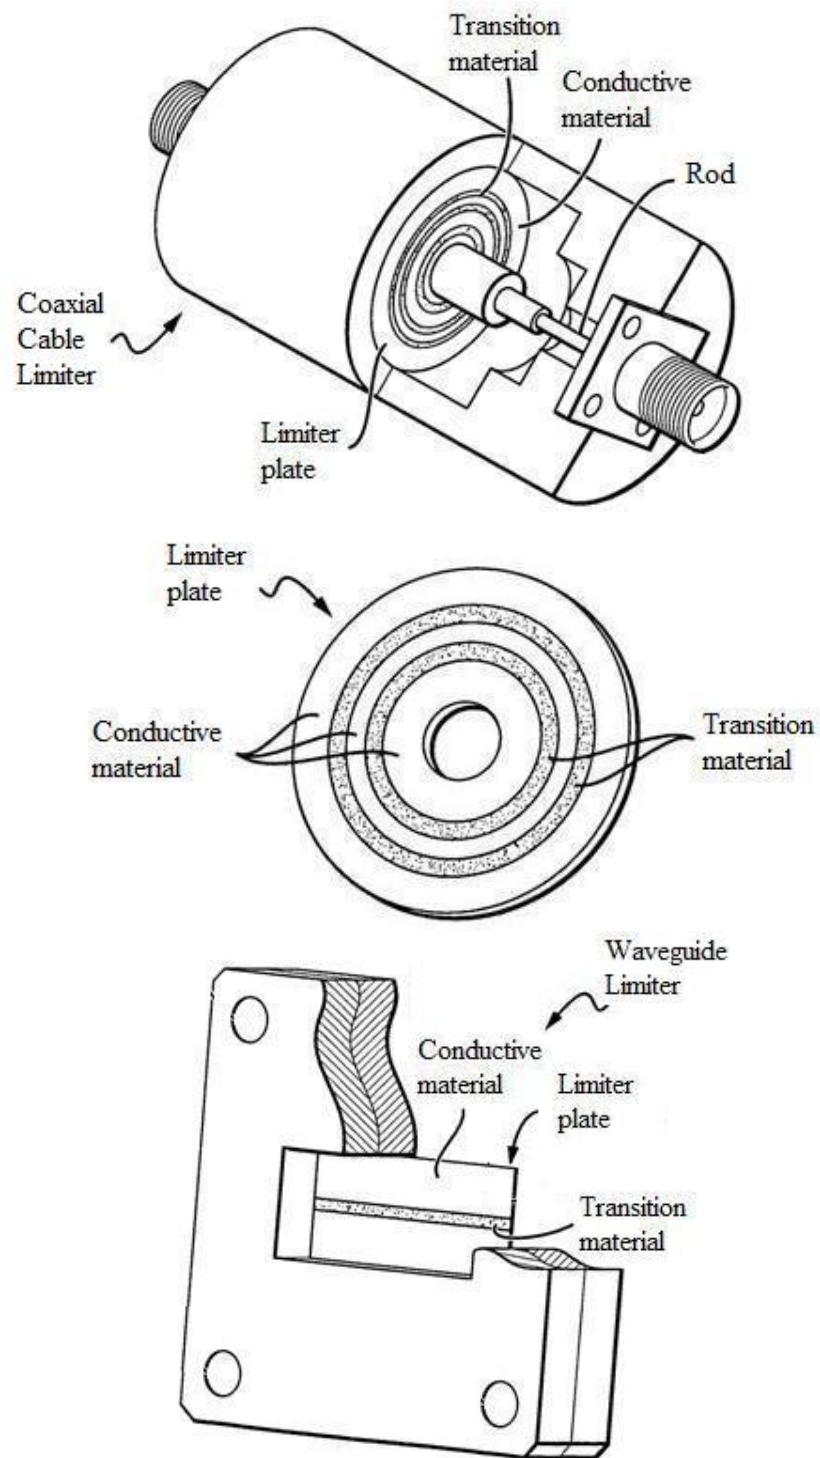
Drawings of coaxial cable and waveguide limiter [3]
